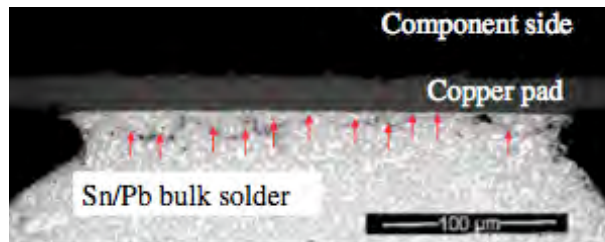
Fracture in the solder on the package side of the interconnect [86].
